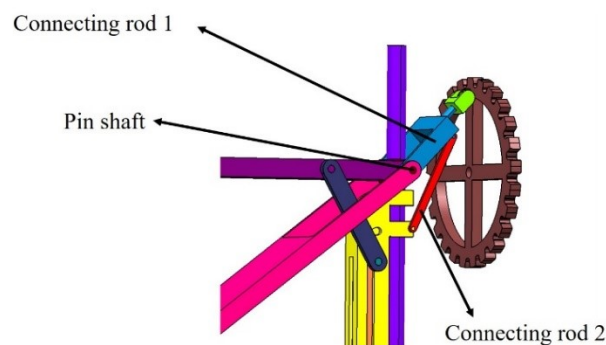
Single-degree-of-freedom gear drive mechanism.
